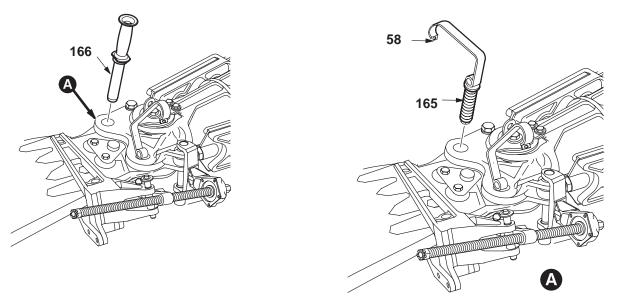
Install Aircraft Blade Pin on Leading Edge Side of Blade
